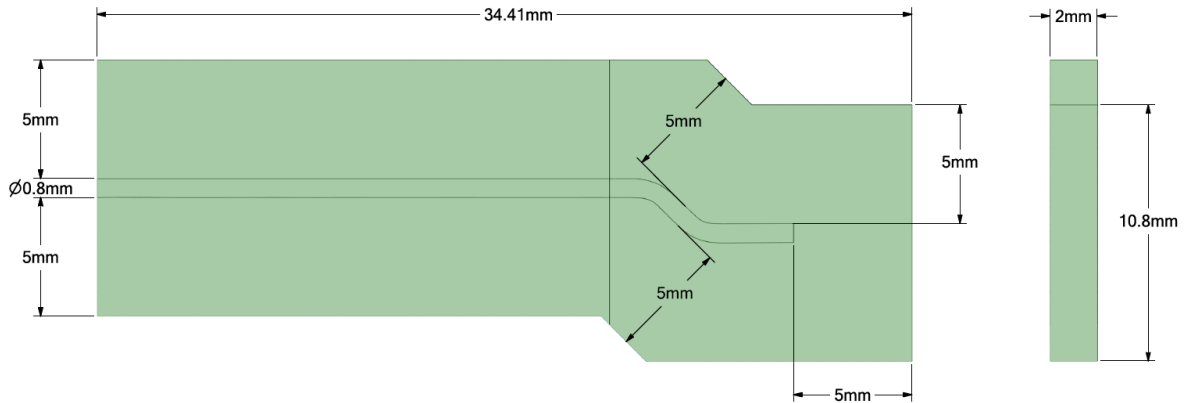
Dimensions of the concrete and embedded fibre geometry
